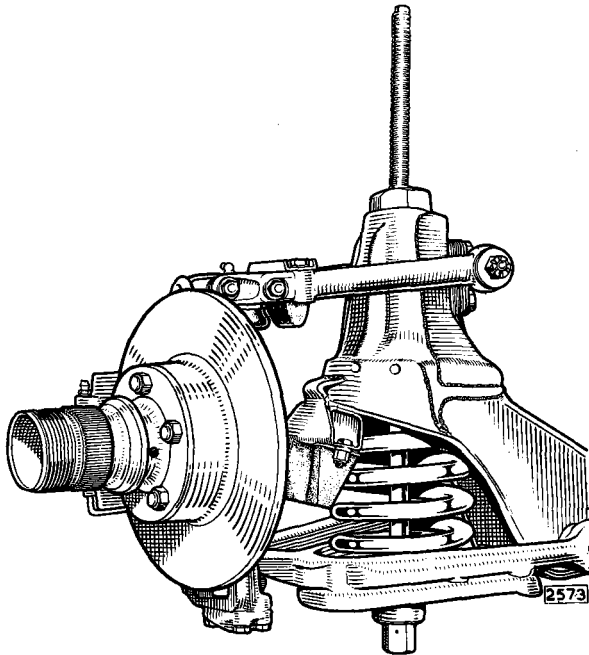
Showing the compressor in position prior to the removal of the Coil Spring.
